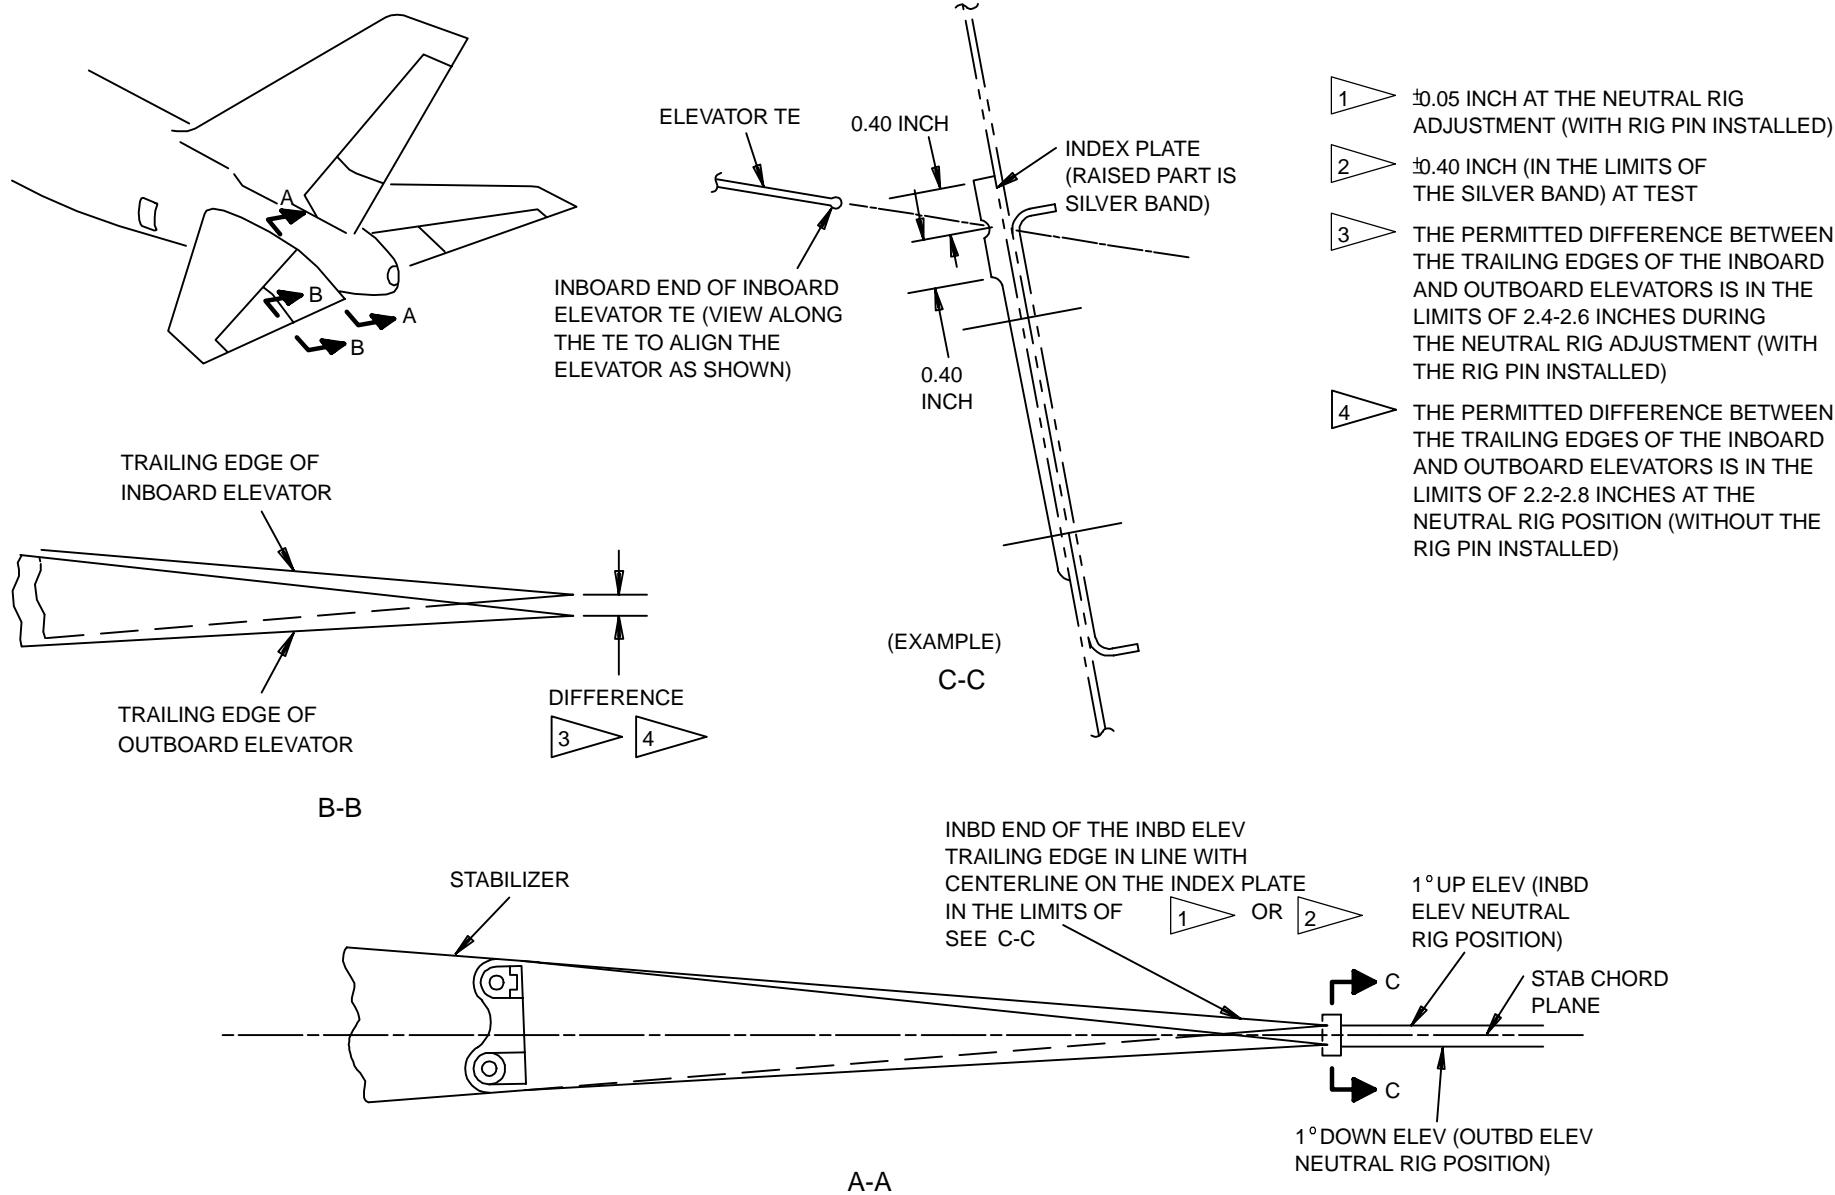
IN- AND OUTBOARD ELEVATOR ADJUSTMENT
